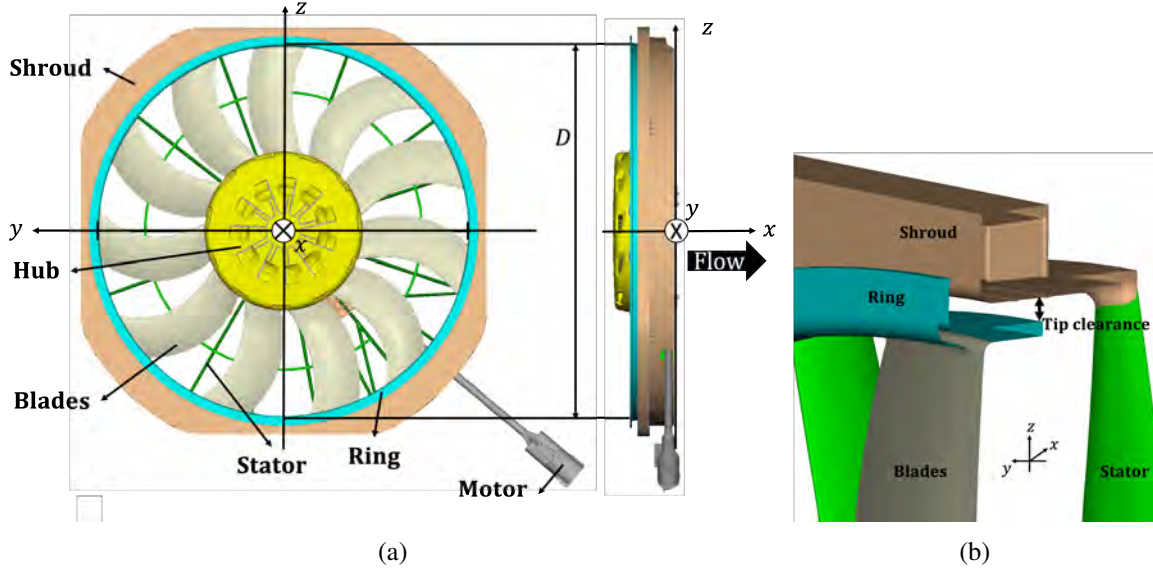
Tested automotive engine cooling fan. The main parts in which the fan consists are shown with different colors. (a): Cooling fan. (b): Tip clearance detail.
